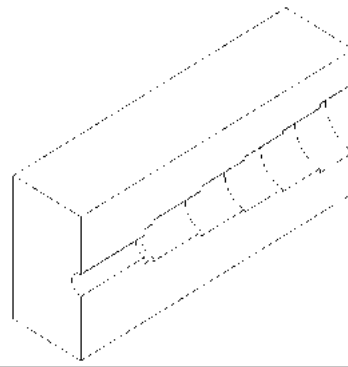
Prismatic workpiece which should make a list of sets of tools.
